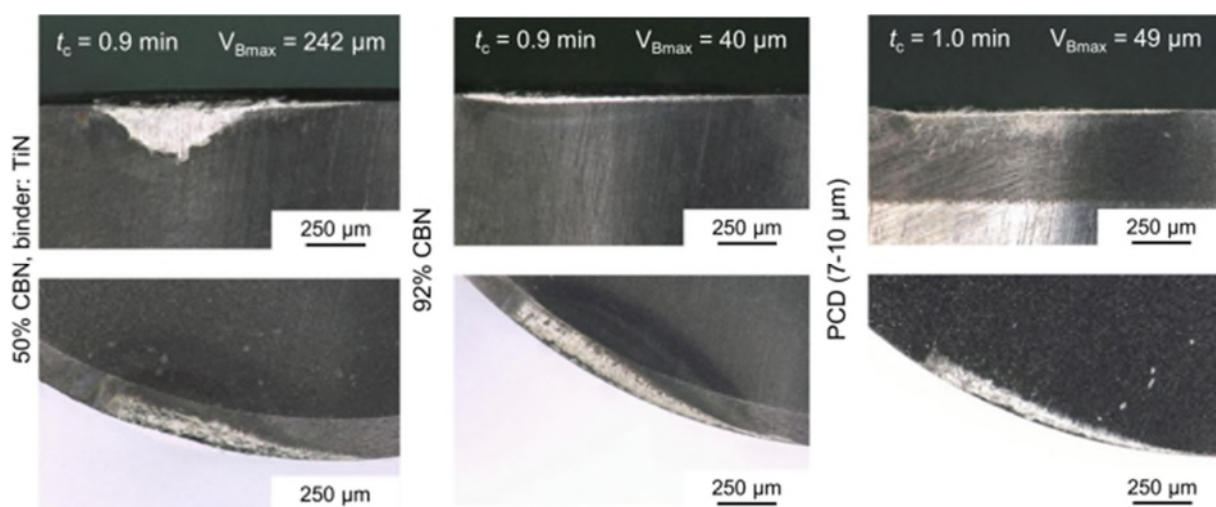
Tool wear observations for 50% CBN, 92% CBN and PCD cutting insert after turning Ti-43.5Al-4Nb-1Mo-0.1B [14].
